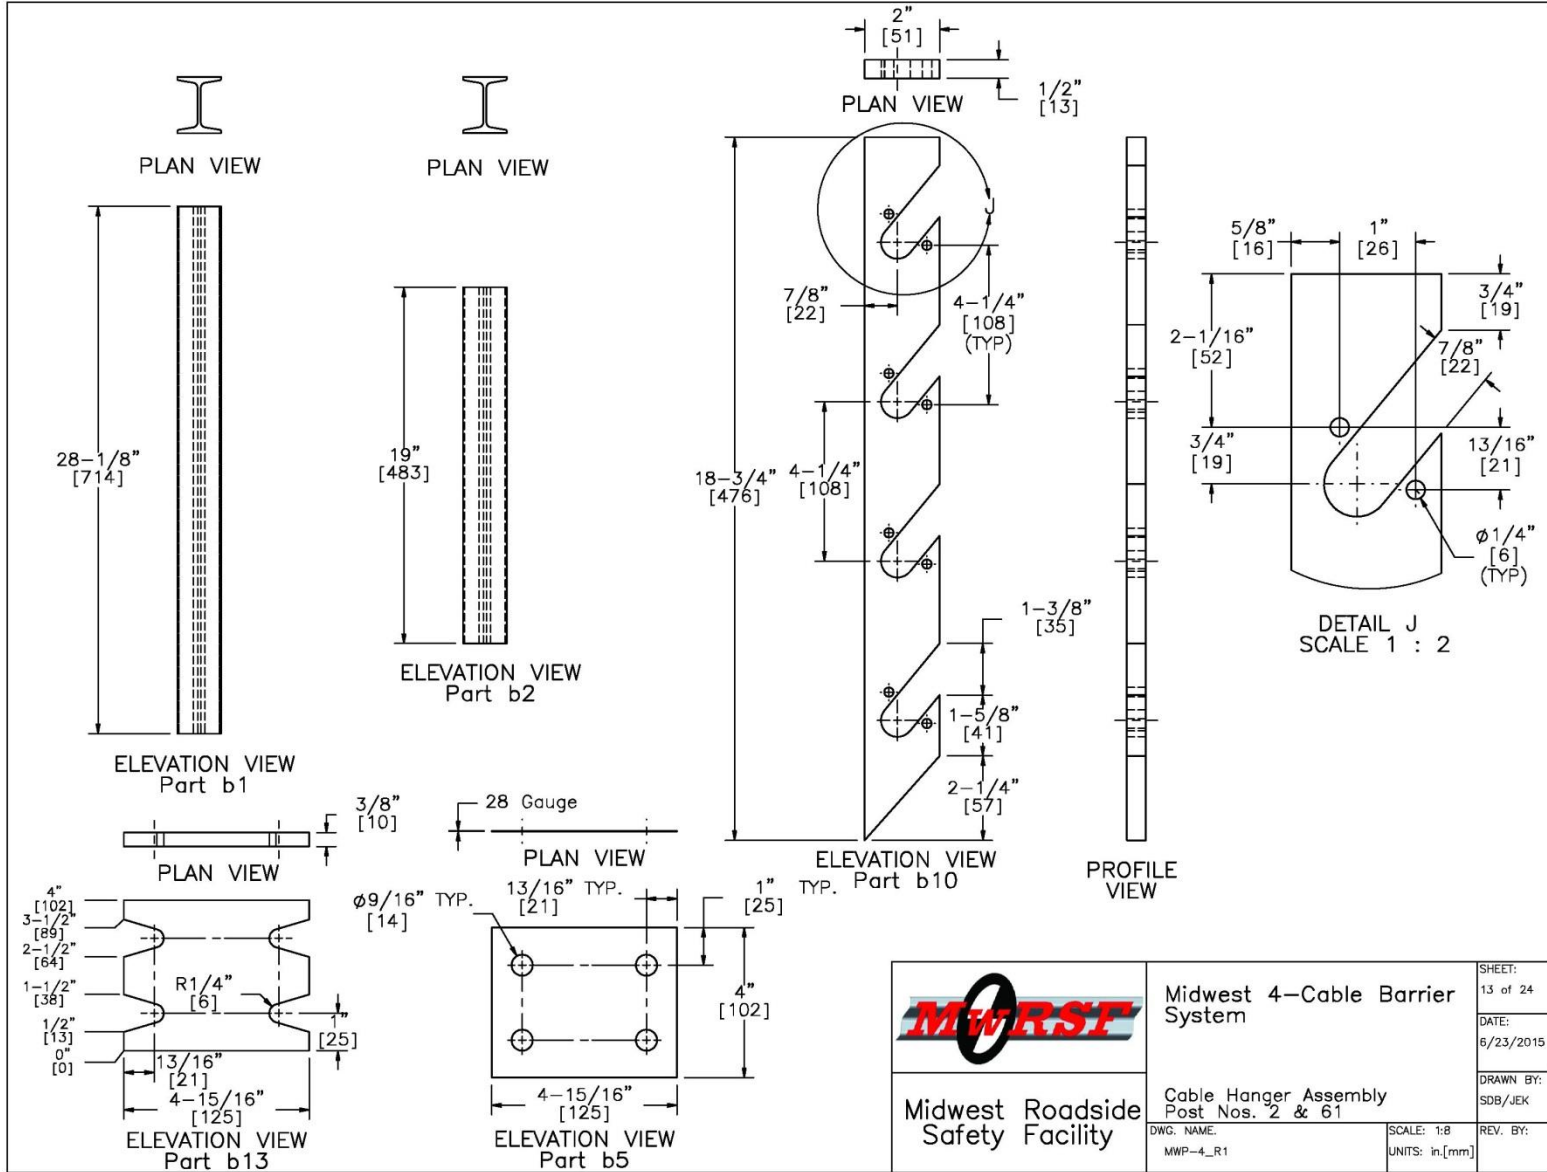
Cable Hanger Assembly, Post Nos. 2 and 61, Test No. MWP-4
